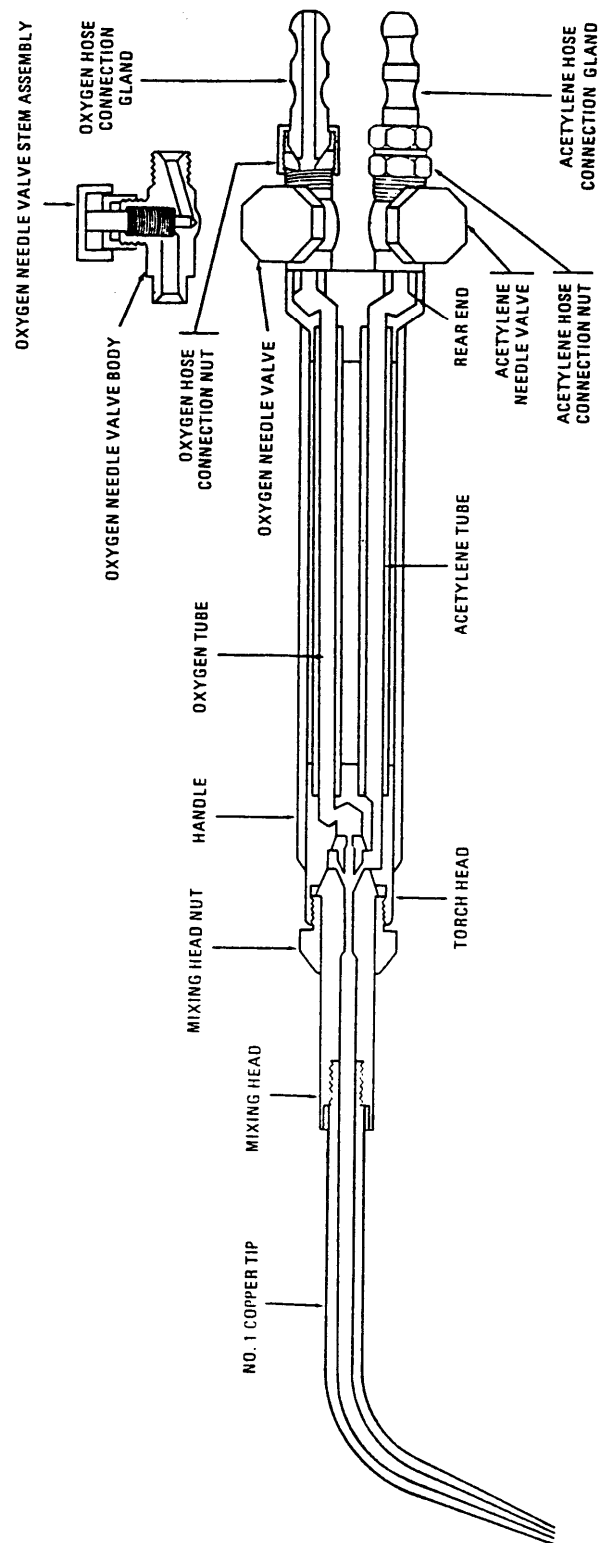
Equal Pressure Type, General Purpose Welding Torch
